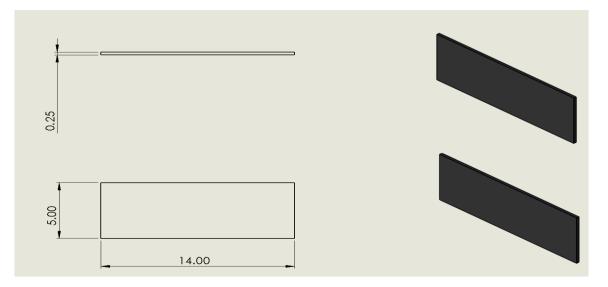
Drawing of the Short rubber pad component, with dimensions given in inches.
